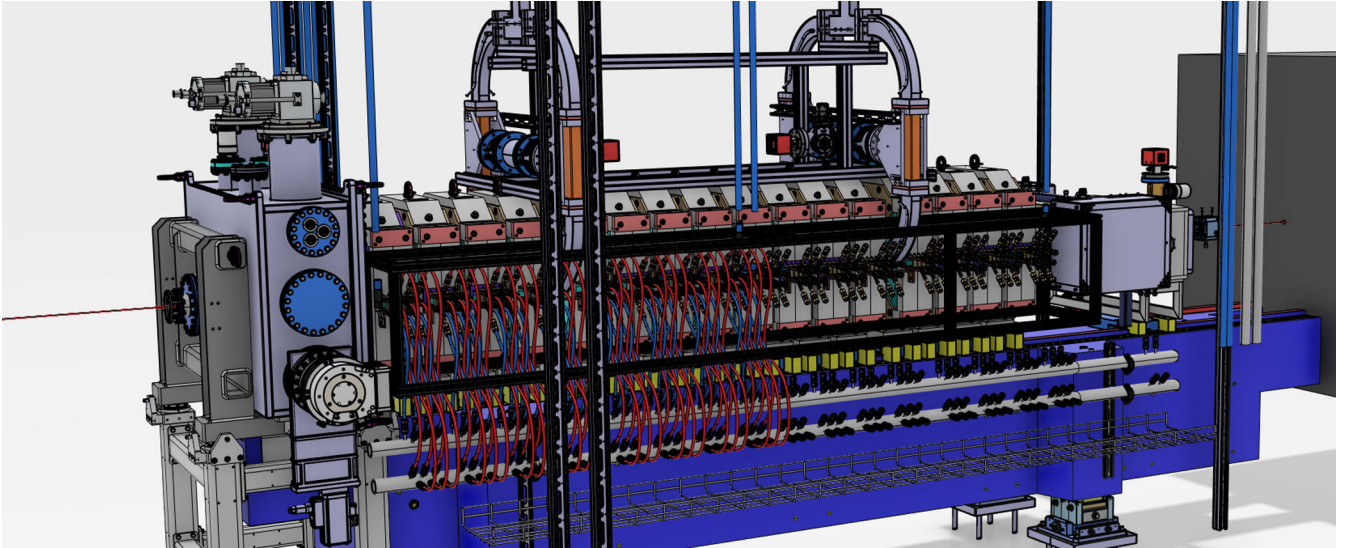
Reconstruction of  $P^3$  components mounted on a girder, recreated according to latest mechanical design assembly.
